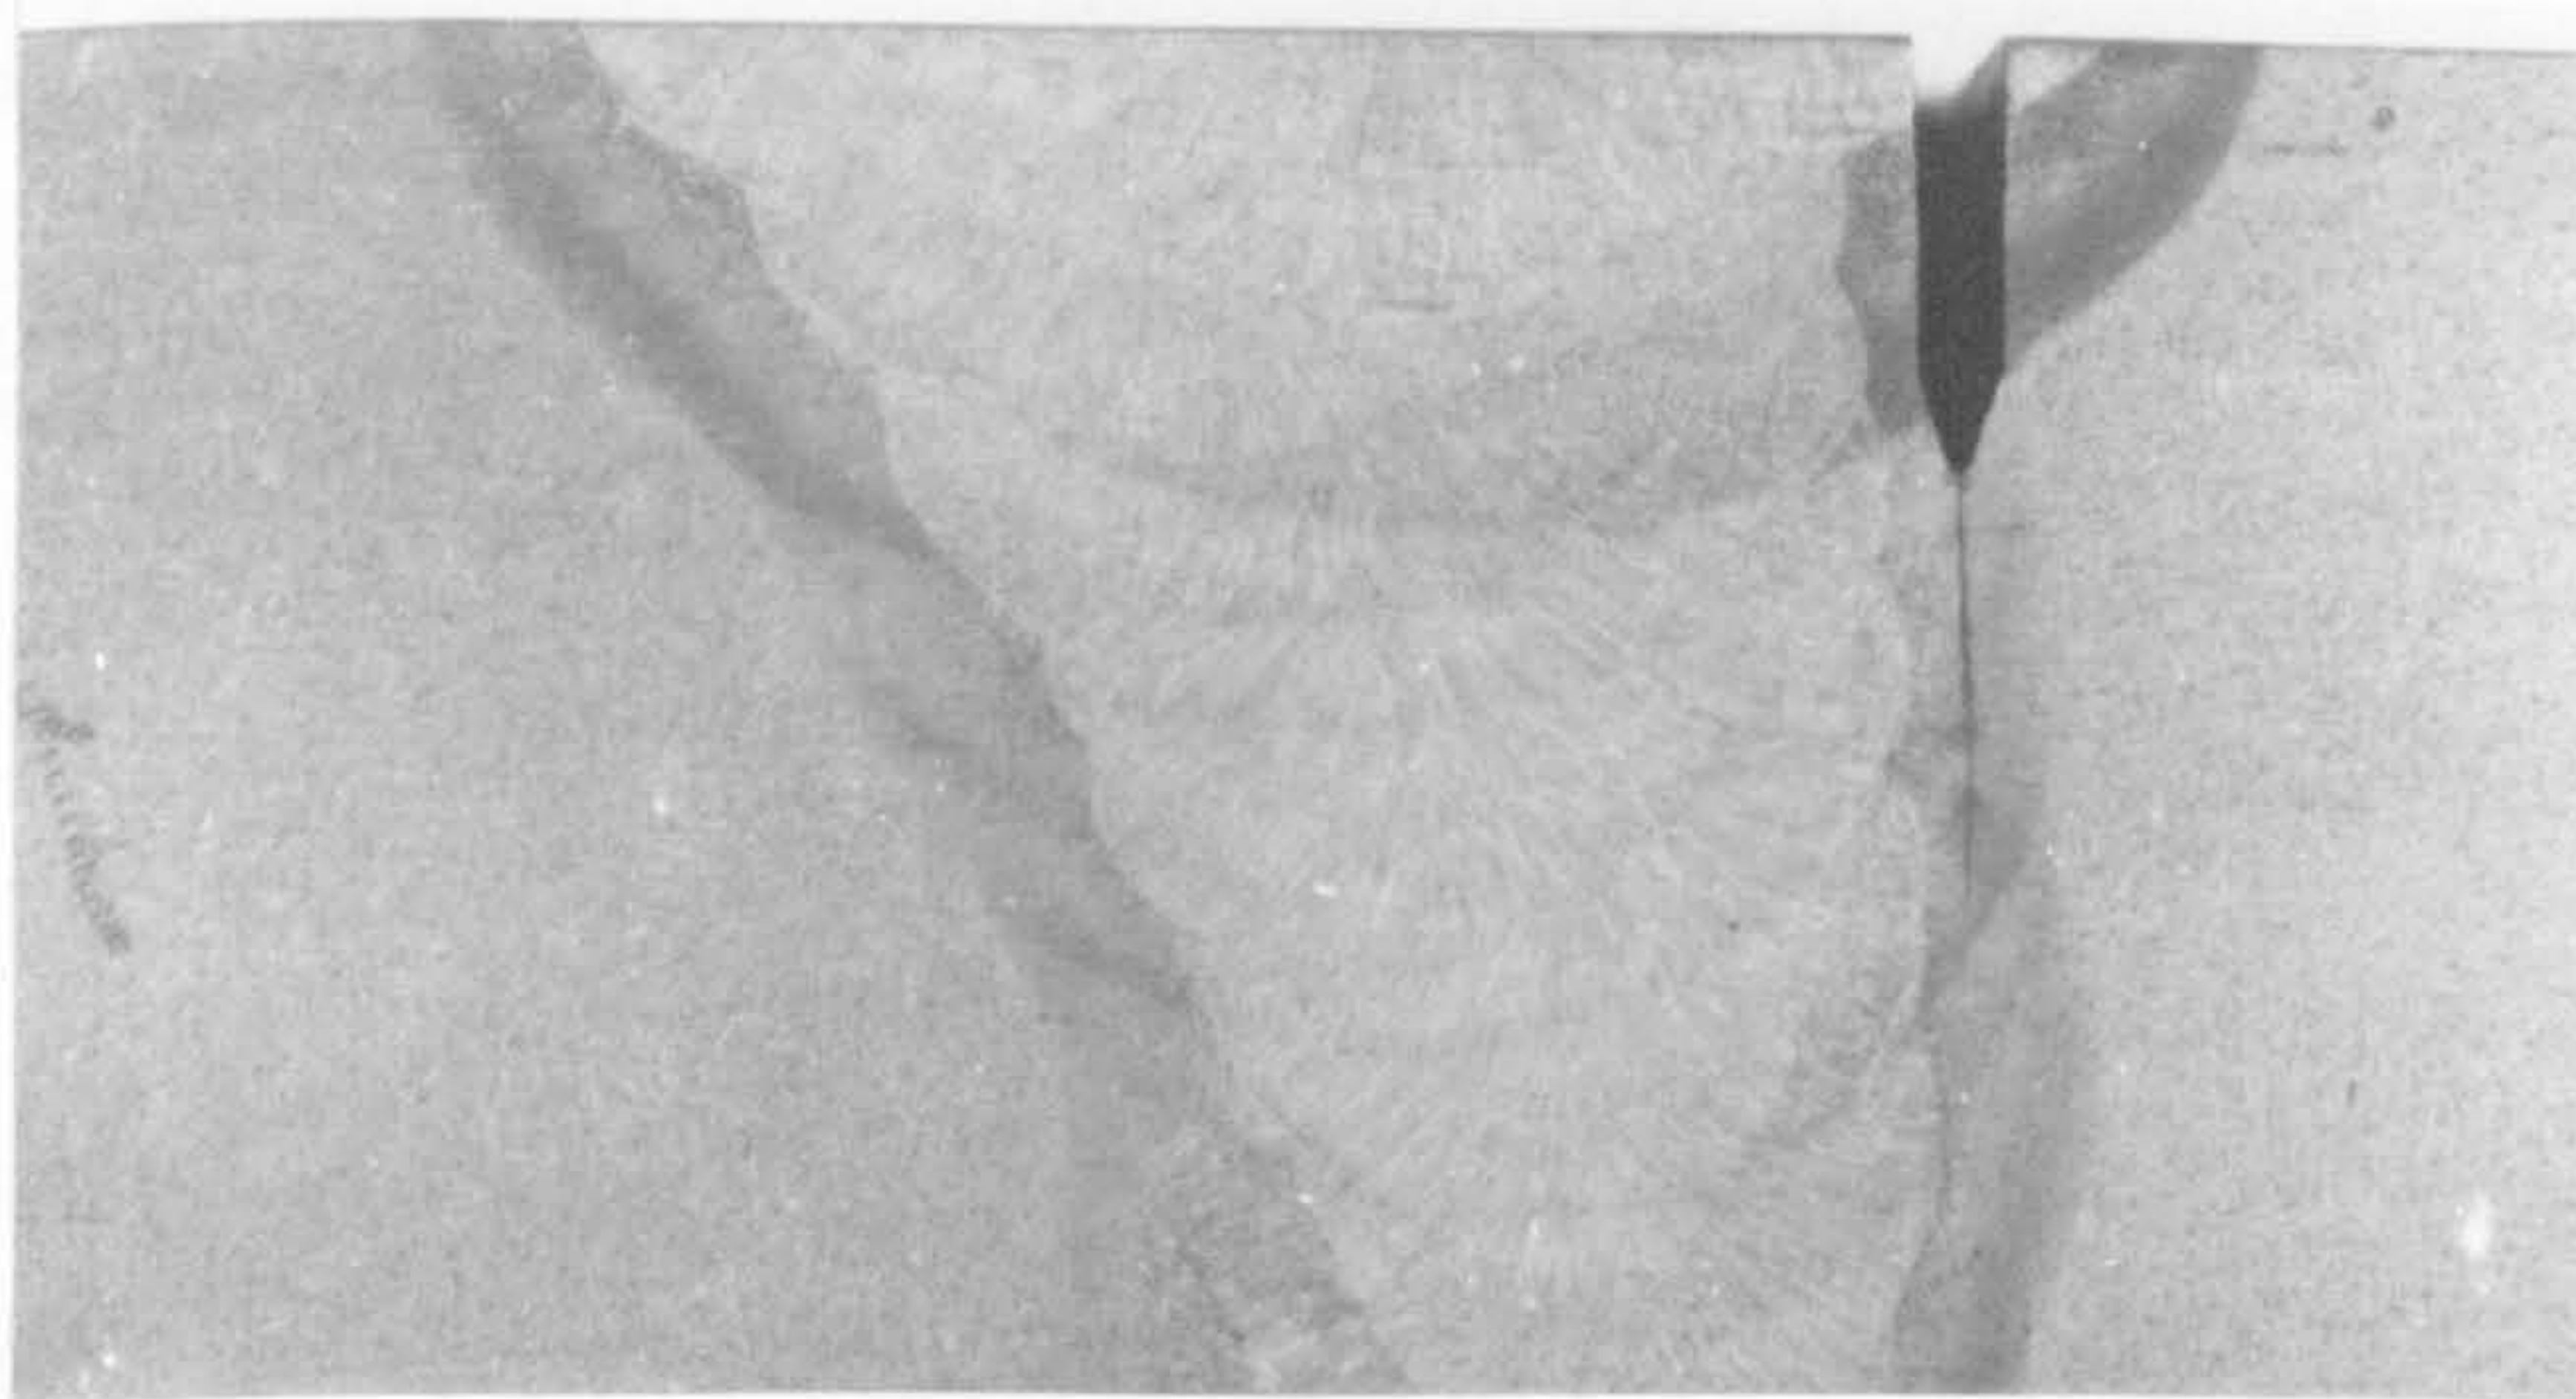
Macrograph showing machined notch and subsequent corrosion fatigue crack growth in the H.A.Z.
